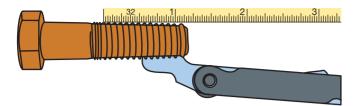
Thread pitch gauge used to measure the pitch of the thread. This bolt has 13 threads to the inch.
